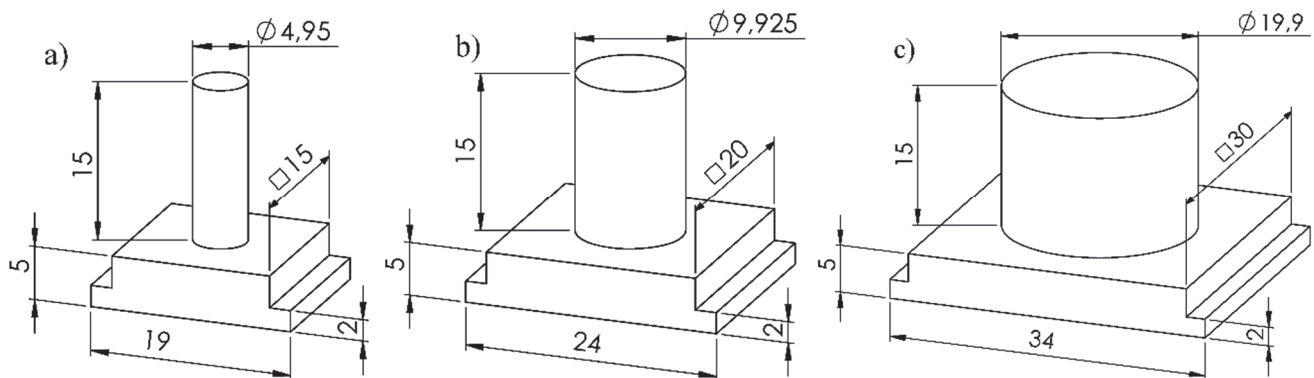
Design of test specimens with a cylindrical protrusion in nominal dimensions: a) 5 mm; b) 10 mm and c) 20 mm
